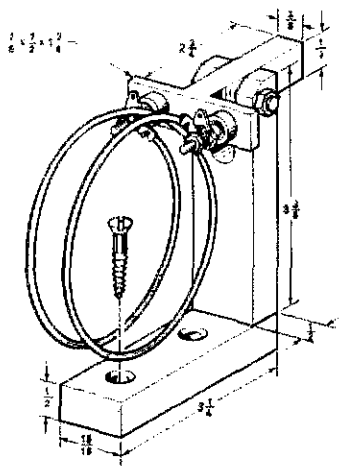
The variable link with dimensions for construction of the coil assembly. The two-turn 80-meter link is shown installed.
